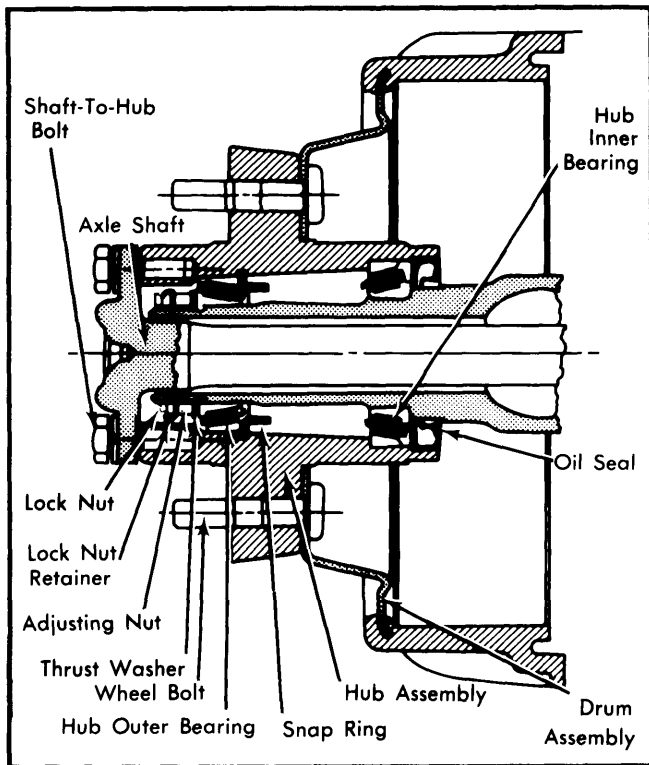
Sectional View of Axle Shaft and Bearings With Snap Ring Bearing Retainer
